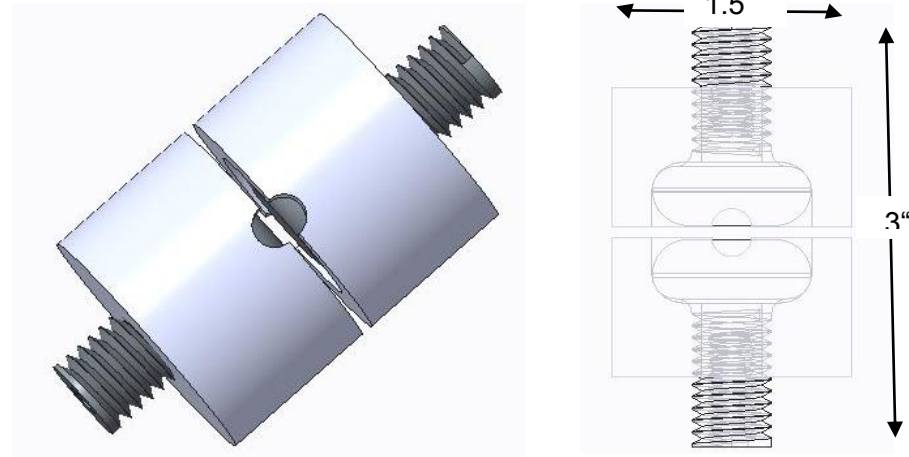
(Left) Color view of PEF assembly, (right) hidden line view of PEF assembly.
